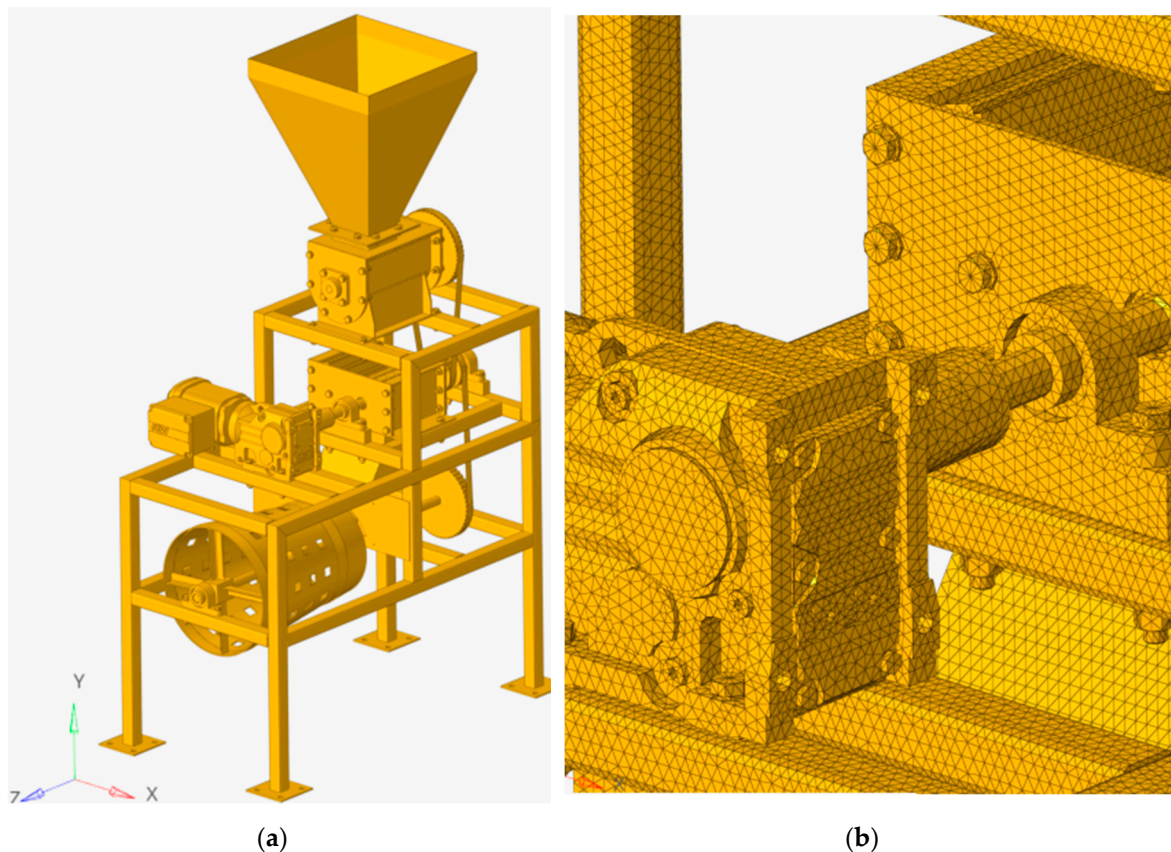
(a) Meshed shell craking machine model; (b) Mesh of the machine.
